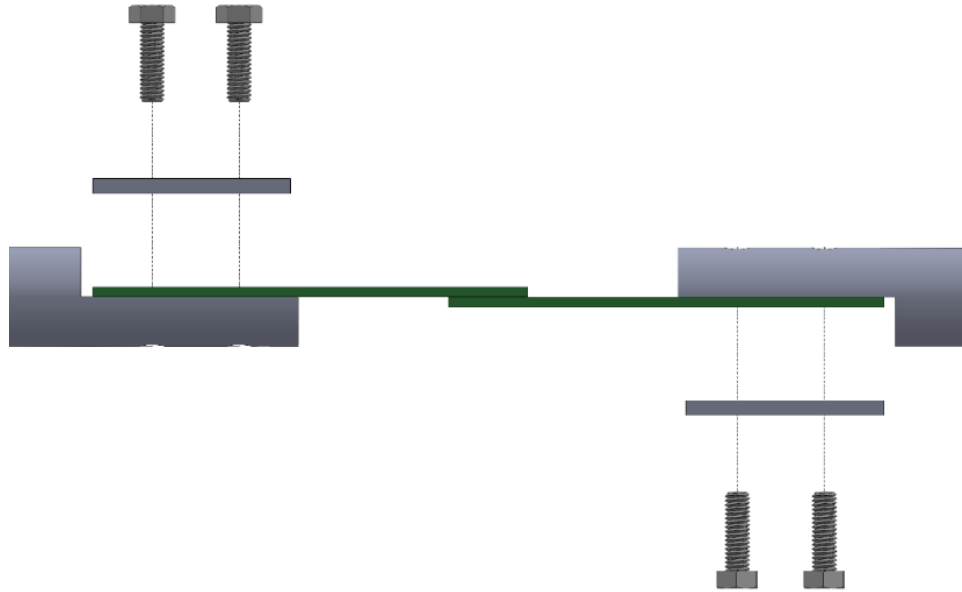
Fixture diagram for monotonic and fatigue specimens
